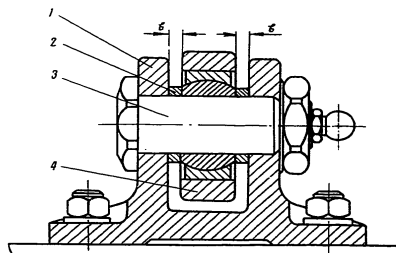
ATTACHING FMK-1 WING CONTROL MECHANISM ROD TO CENTRE-SECTION SPAR FITTING
